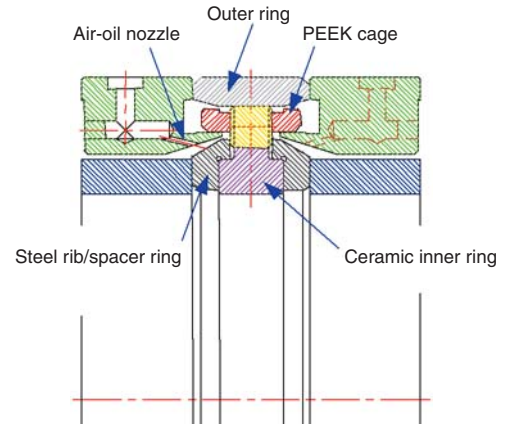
N-type cylindrical roller bearing with a ceramic inner ring
